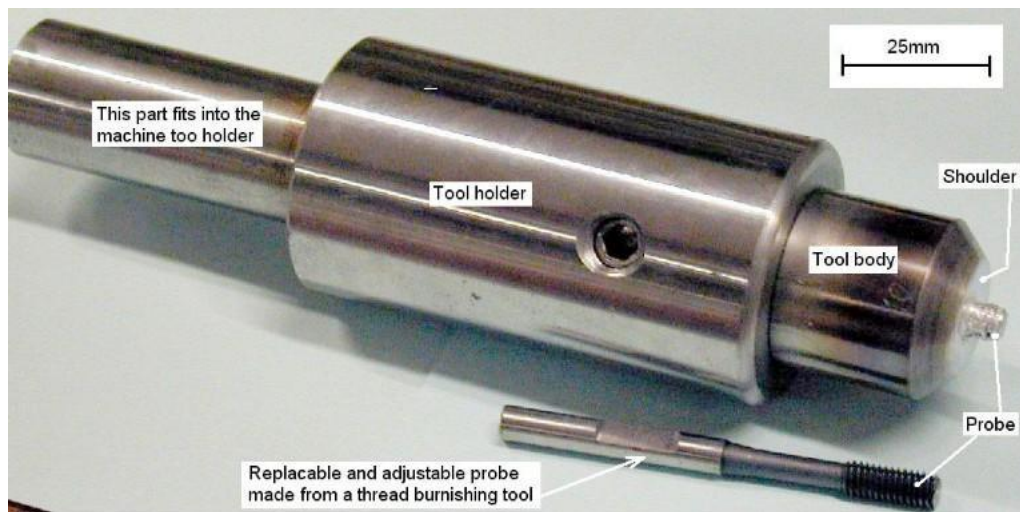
The welding tool – Courtesy of [1-22]
